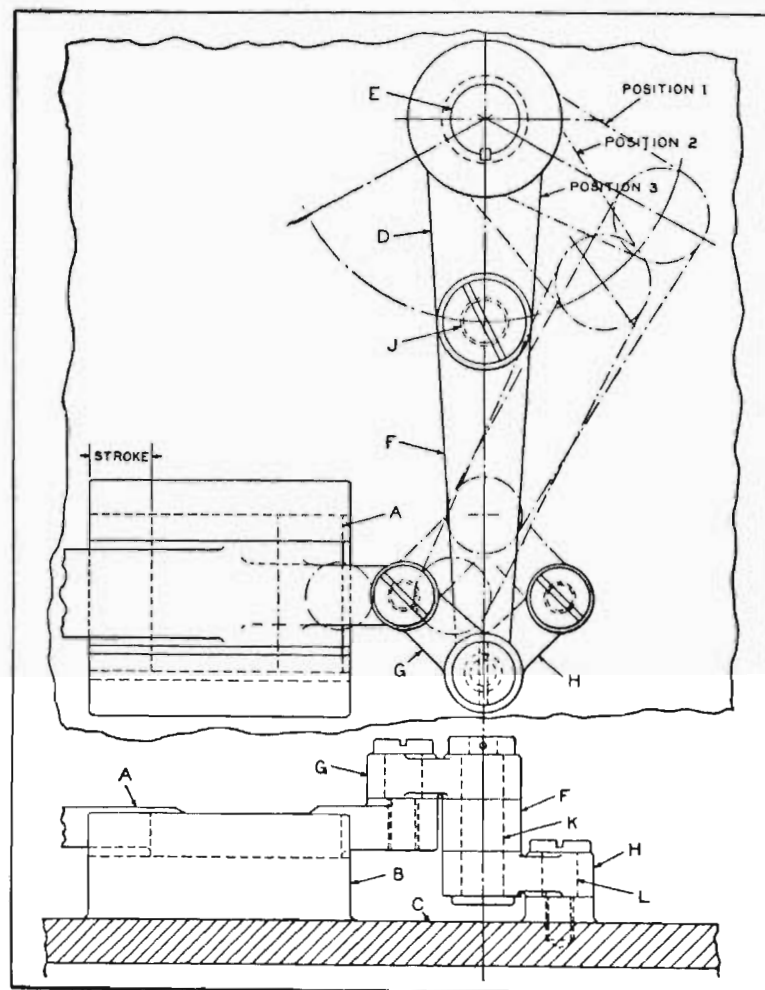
Reciprocating Slide of a Metal Ribbon Crimping Machine, Operated by Oscillating Arm and Link Mechanism
